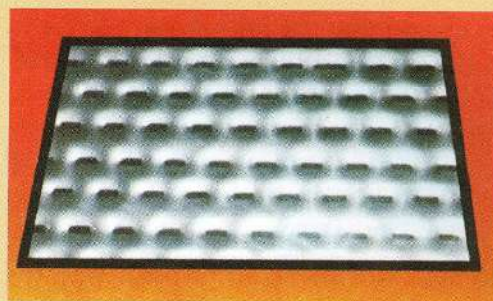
Cad/Cam designed SS plate coils for fluid cooling.
